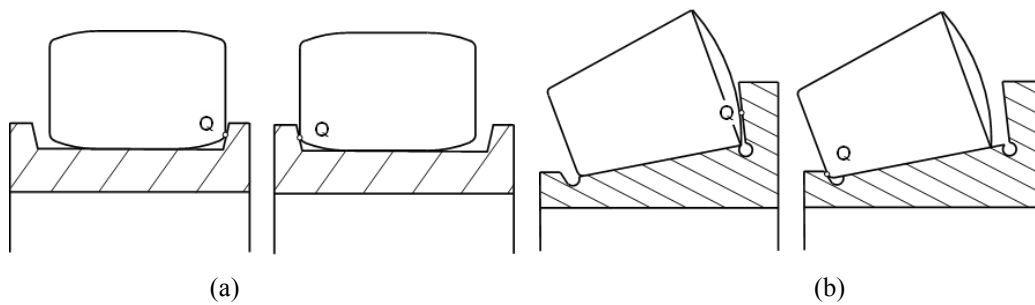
Contact geometry between rollers and flanges. Point  $Q$  refers to the contact point for a tapered roller.
